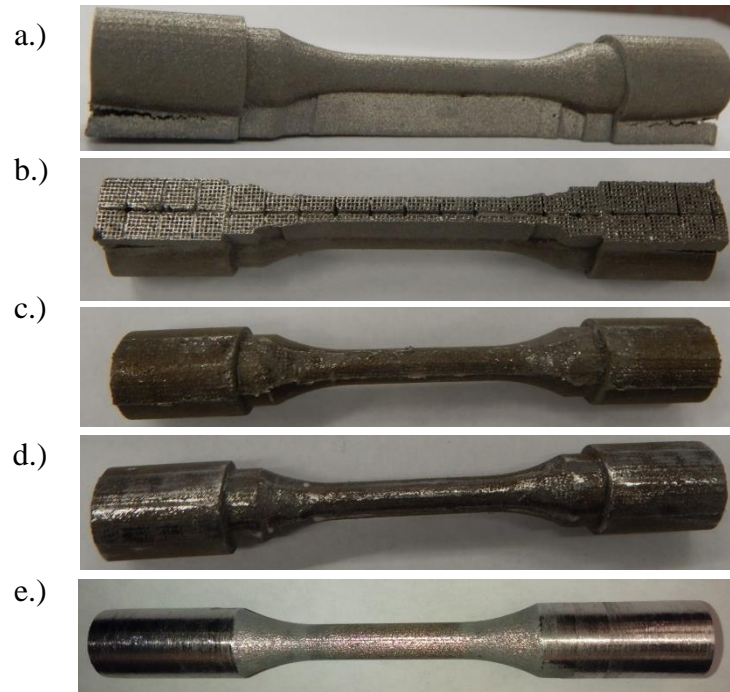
As-built DMLS SS GP1 Sample 12 a.) front view before removal from build plate, b.) bottom view showing boxed support structure, c.) after support structure removal, d.) after filing sample to remove support structure remnants, e.) final sample after machining gripping section and removing machining marks [Siddiqui, 2018]
